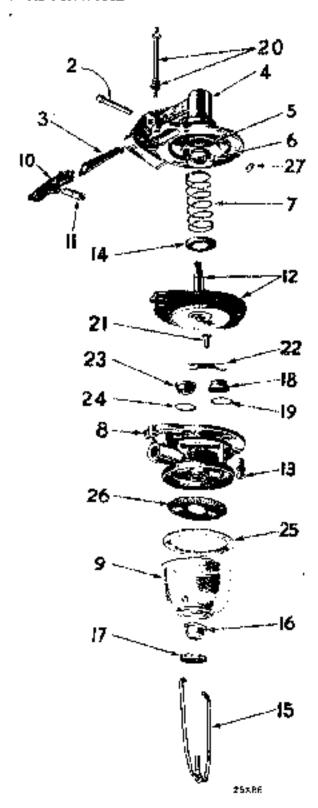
Fuel Pump (Disassembled Vimu) (1939-42 Madels)
